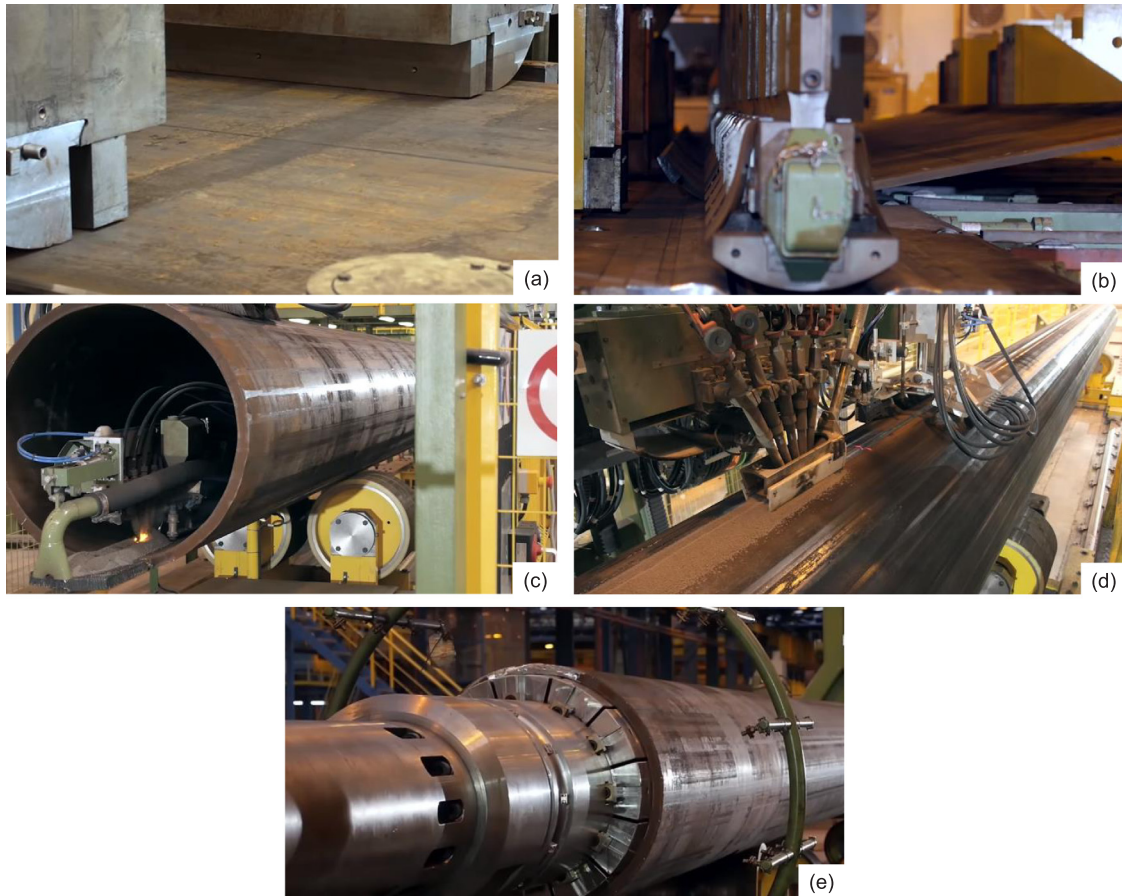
JCO-E pipe manufacturing process; (a) crimping press, (b) JCO press, (c) inside welding process, (d) outside welding process, (e) mechanical expander [photos provided by Corinth Pipeworks S.A.].
